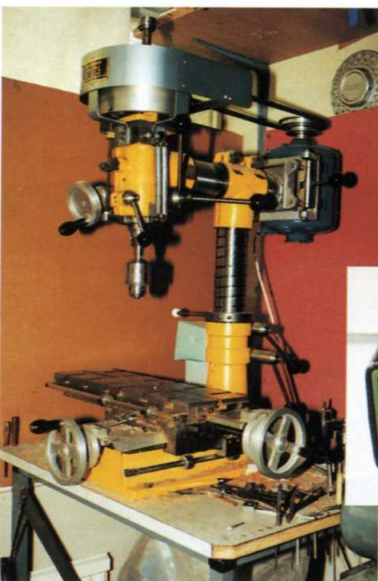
Dore Westbury milling machine can be built from kit of parts providing lathe is available.
